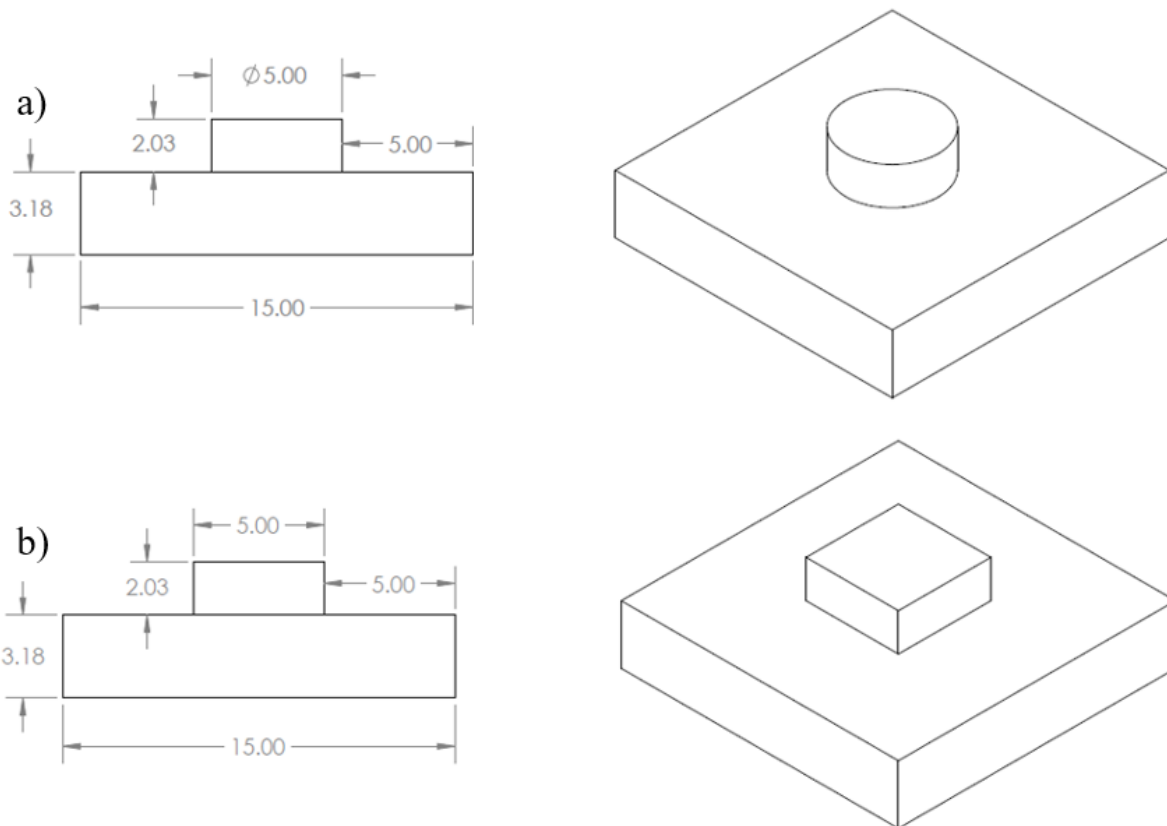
Schematic showing a) the cylinder geometry used and b) the cube geometry used in the case study, as well as dimensions in millimeters.
